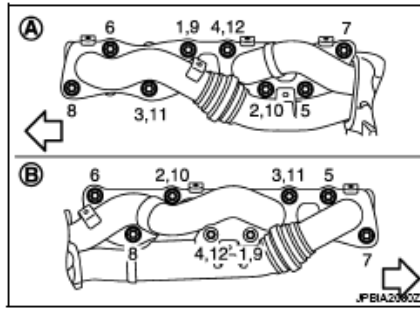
Identifying Exhaust Manifold Bolts Tightening Sequence
